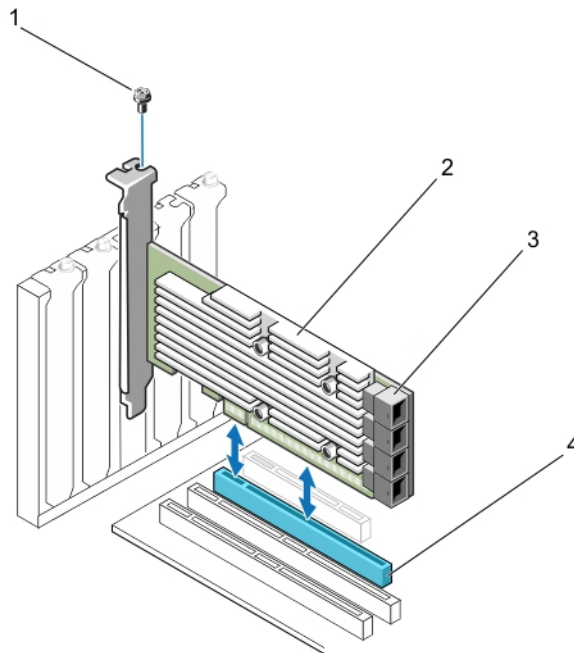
Removing and Installing a PCIe Extender Adapter Card
